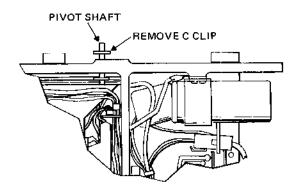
CARTRIDGE GUIDE REMOVAL
